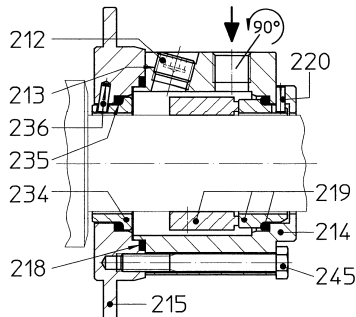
G0S and G0T, mechanical seal, single-acting with throttle ring
